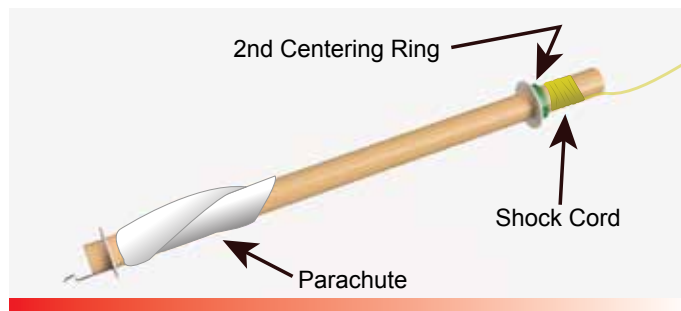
The engine mount of the rear ejection rocket. Wind the shock cord around the front end, and it will slide off easily at motor ejection.
